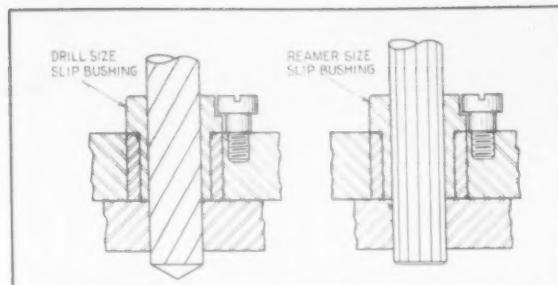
Here a second interchangeable drill bushing has been slipped into the liner after the drill bushing has been removed.
